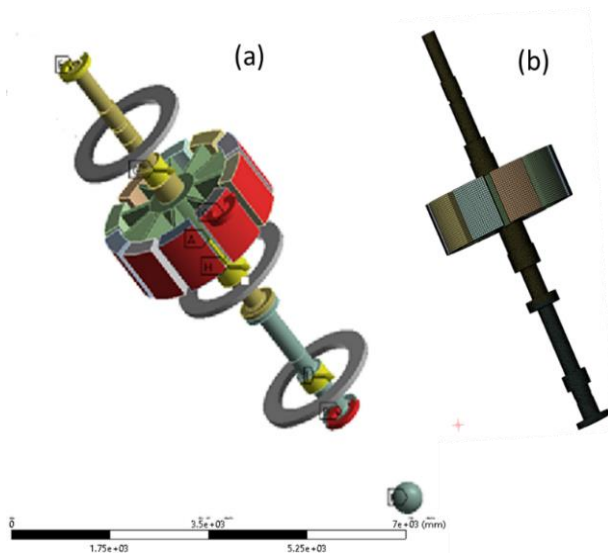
3D geometry of Turbine-Generator shaft with bearing support (a) and discretized geometry (b)
